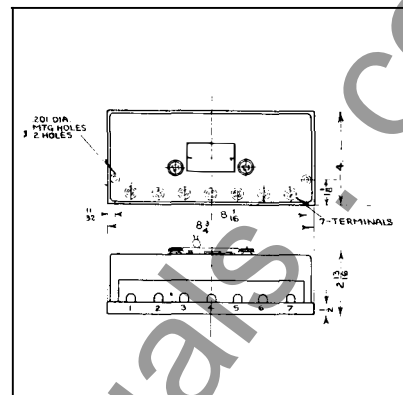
Outline Dimensions and Drilling Plan for Phase Shifting Transformer used with 3-phase, 3-wire Var-meter.
